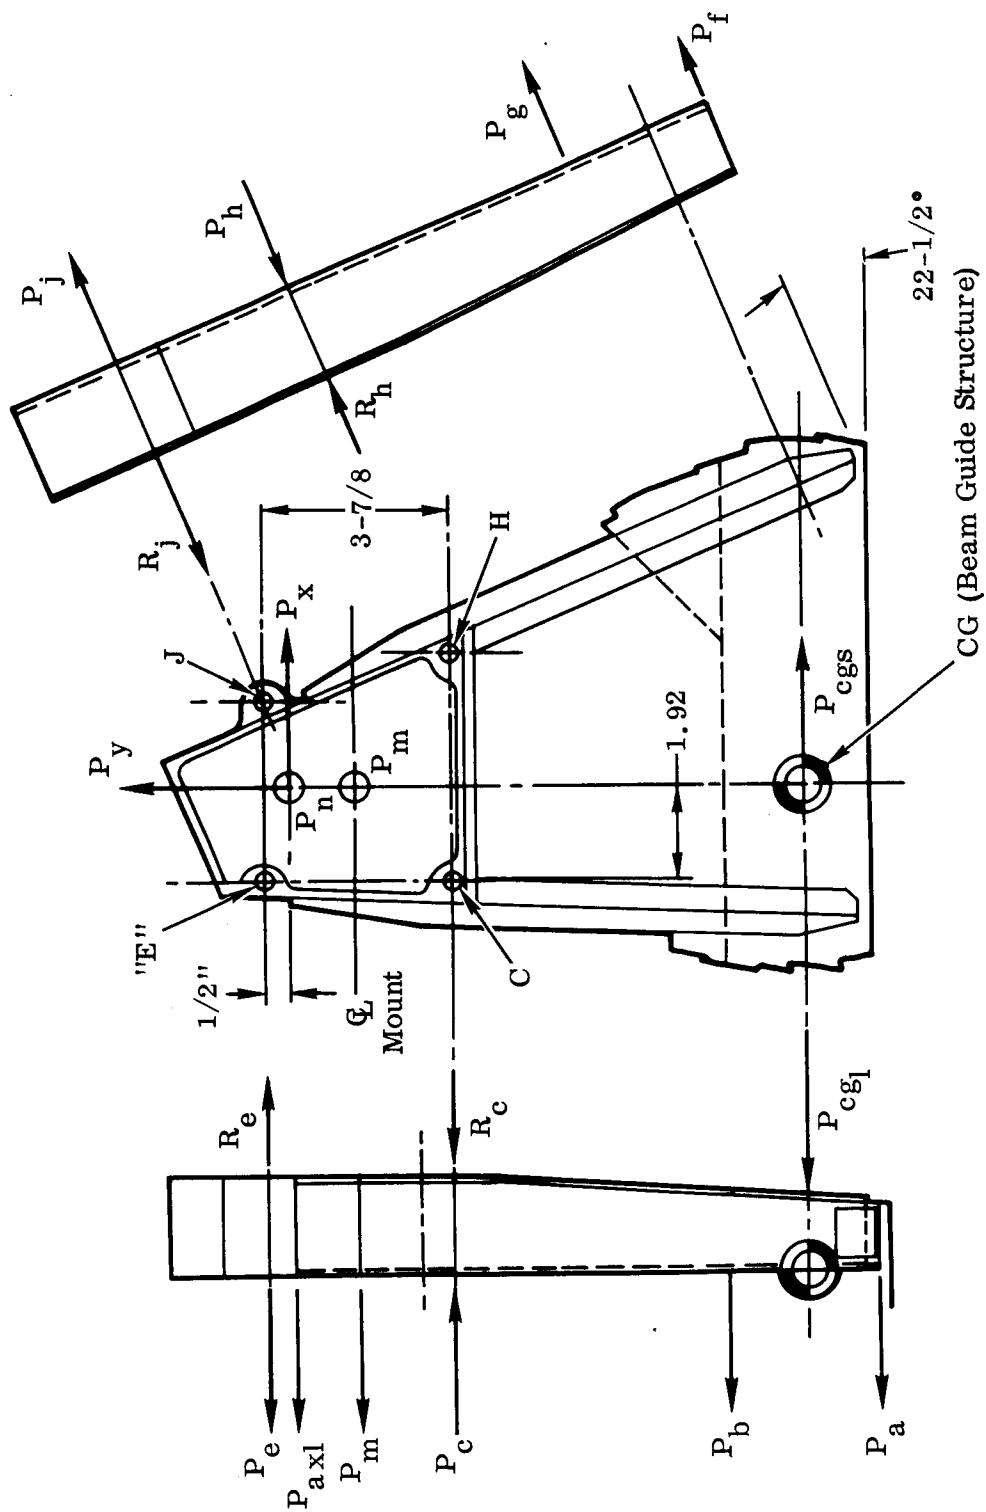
Load Applications on Drum Support and Guide Sleeve Mount Assembly
